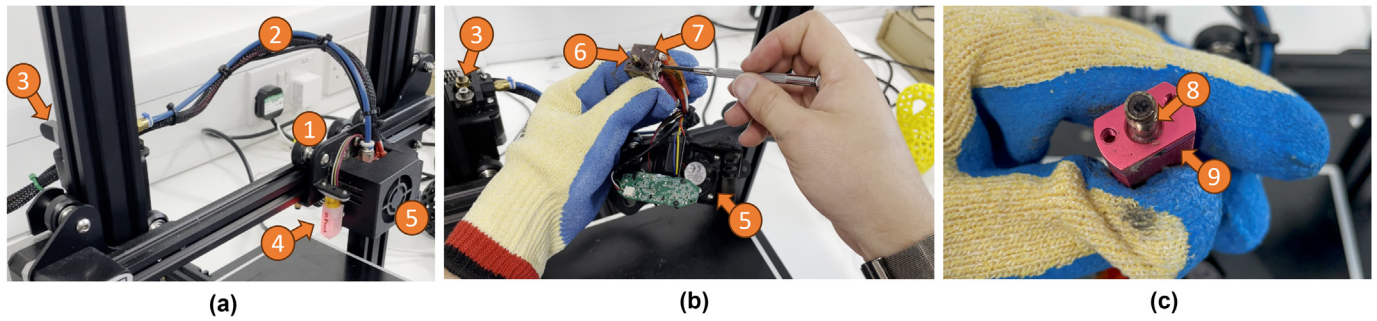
(a-c) A brief overview of the level of disassembly required to reach and correct a severe obstruction of the 3D printer nozzle. (a) The 3D printer in idle state: (1) print head mounted on X-axis carriage, (2) bowden tube, (3) bowden extruder motor mounted on the frame, (4) Z-probe, (5) fan shroud. (b) The disassembled (1) print head with visible components: (5) fan shroud, (6) nozzle and (7) heat block. (c) Inspection of the (8) heat break and (9) heat sink showing an obstruction comprised of carbonized material deposits.
